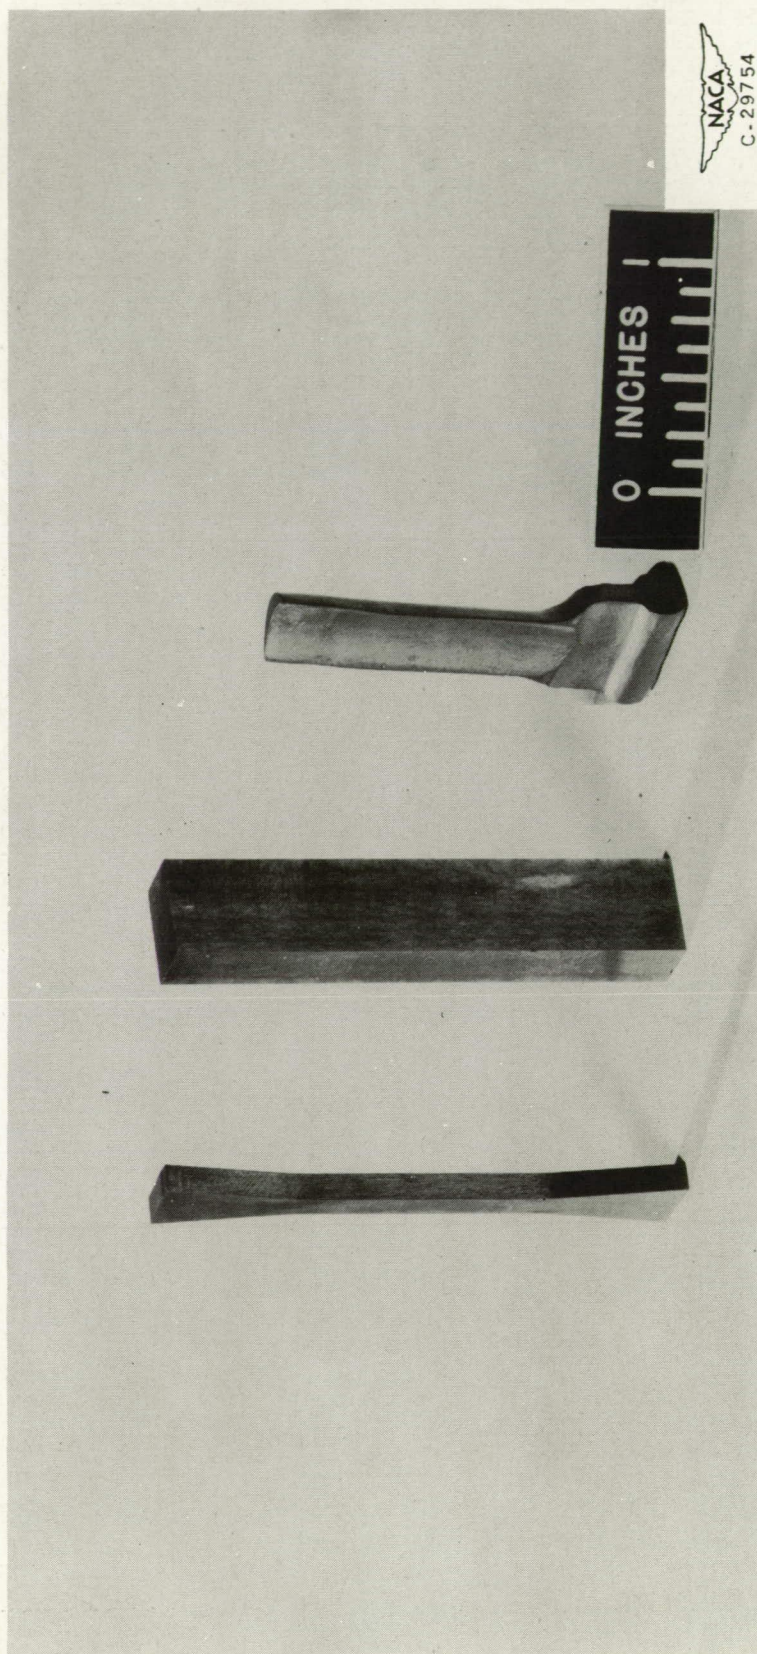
Blade blank machined from partly sintered titanium carbide.
